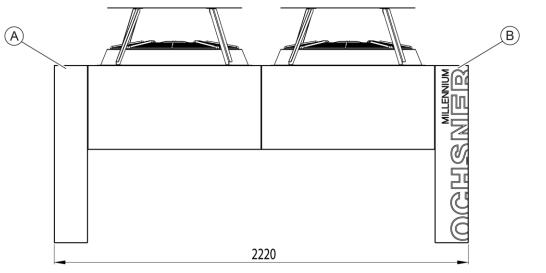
Evaporator dimensions: Heat pump VHS-M 80 with AIR 80 C22A
